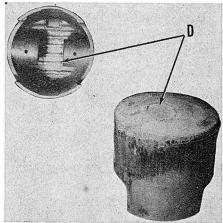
If parts are excessively damaged, cause should be determined and corrected before returning motor to service.
